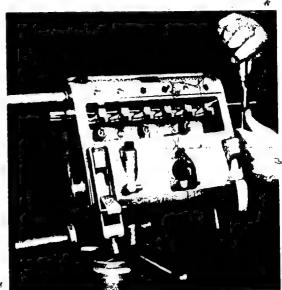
Ream out newly fitted control-rod guide bushes with reamer
